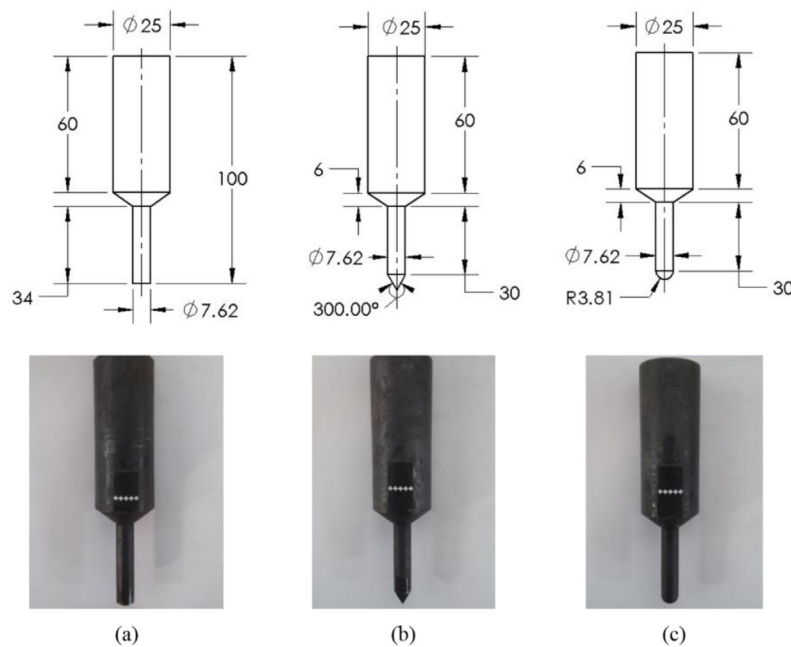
Geometric dimensions and images of the penetrators used in quasi-static tests; (a) blunt, (b) conical, and (c) hemispherical tip.
